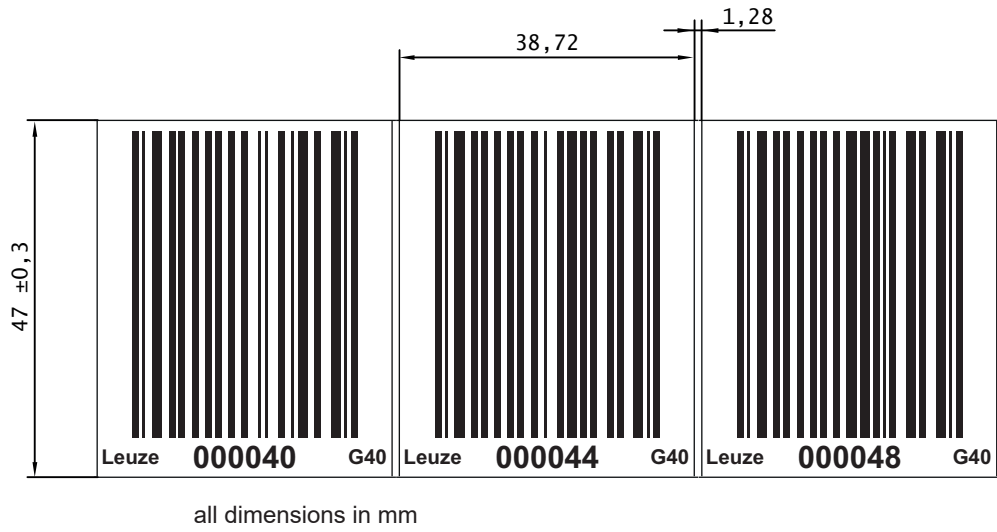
Dimensioned drawing bar code tape ... G40 ... with 40 mm grid
